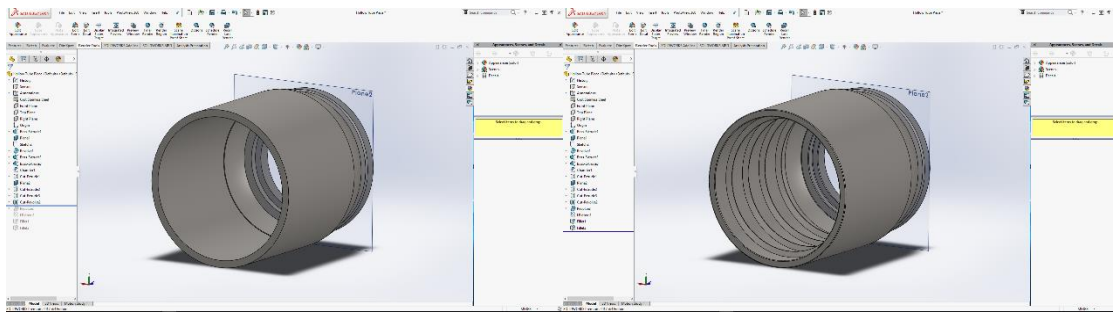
SMSNS-16: CAD Drawing (Stages 3 & 4)
